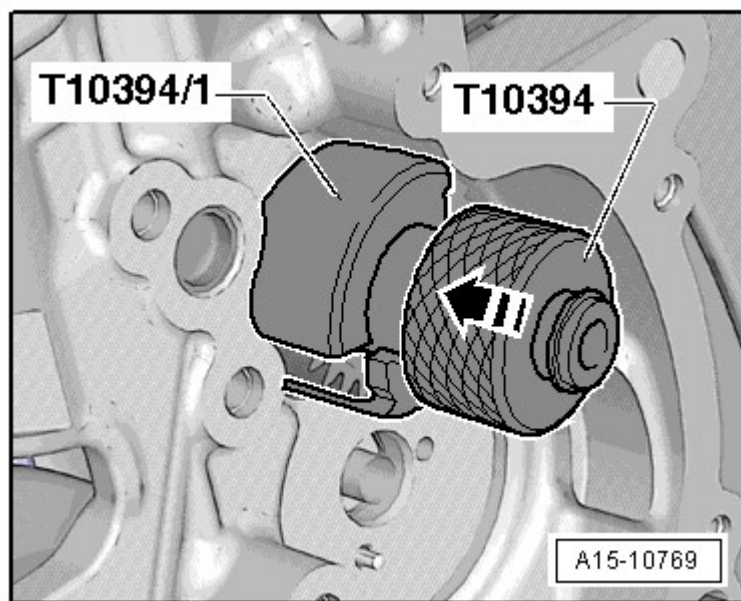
Identifying Installation Of Puller Pieces -T10394- And -T10394/1-
